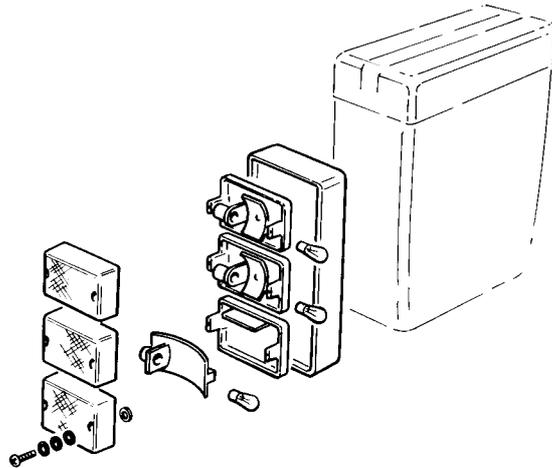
Rear Direction Indicator. Stop/Tail and Fog Lights fitted on Pannier Equipped Machines
